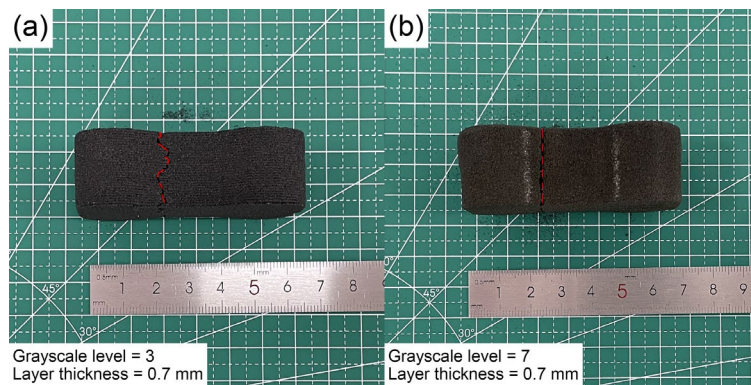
Tensile fracture surfaces of printed sand mold samples at low (a) and high (b) binder content
